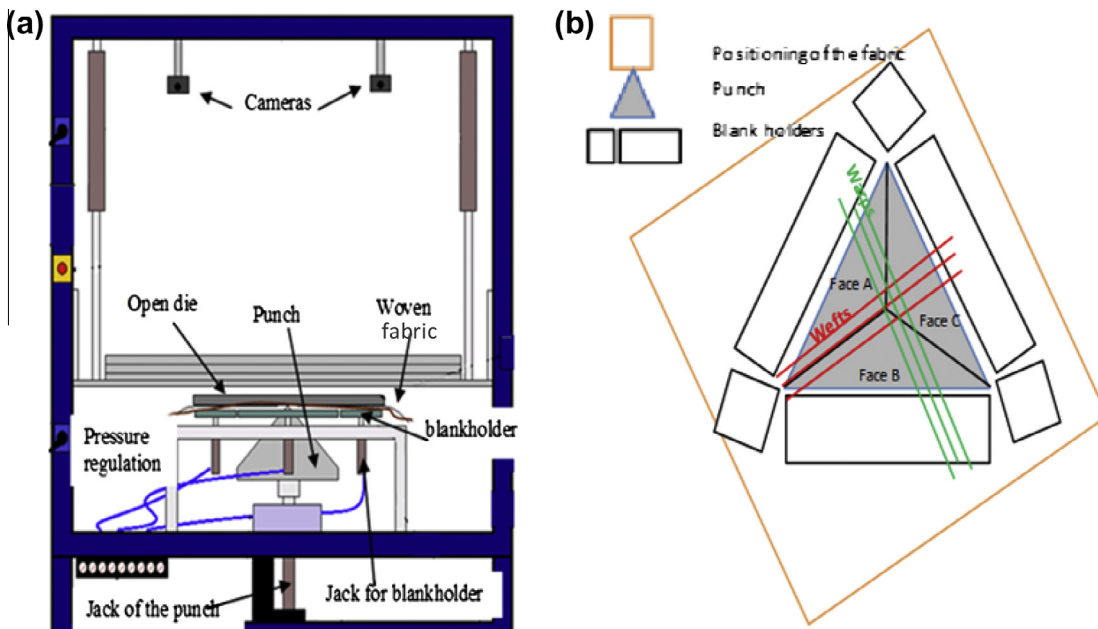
(a) The sheet forming device. (b) Initial positioning of the fabric and first generation blank holder design.
